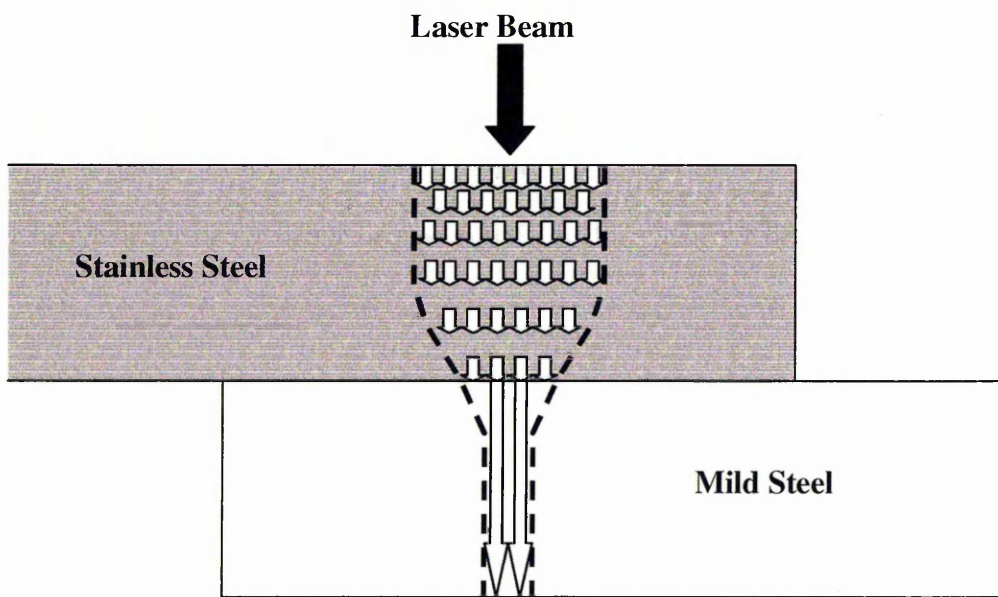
Schematic diagram showing weld bead formed due to base material thermal property differences – stainless steel on the top of the lap joint
